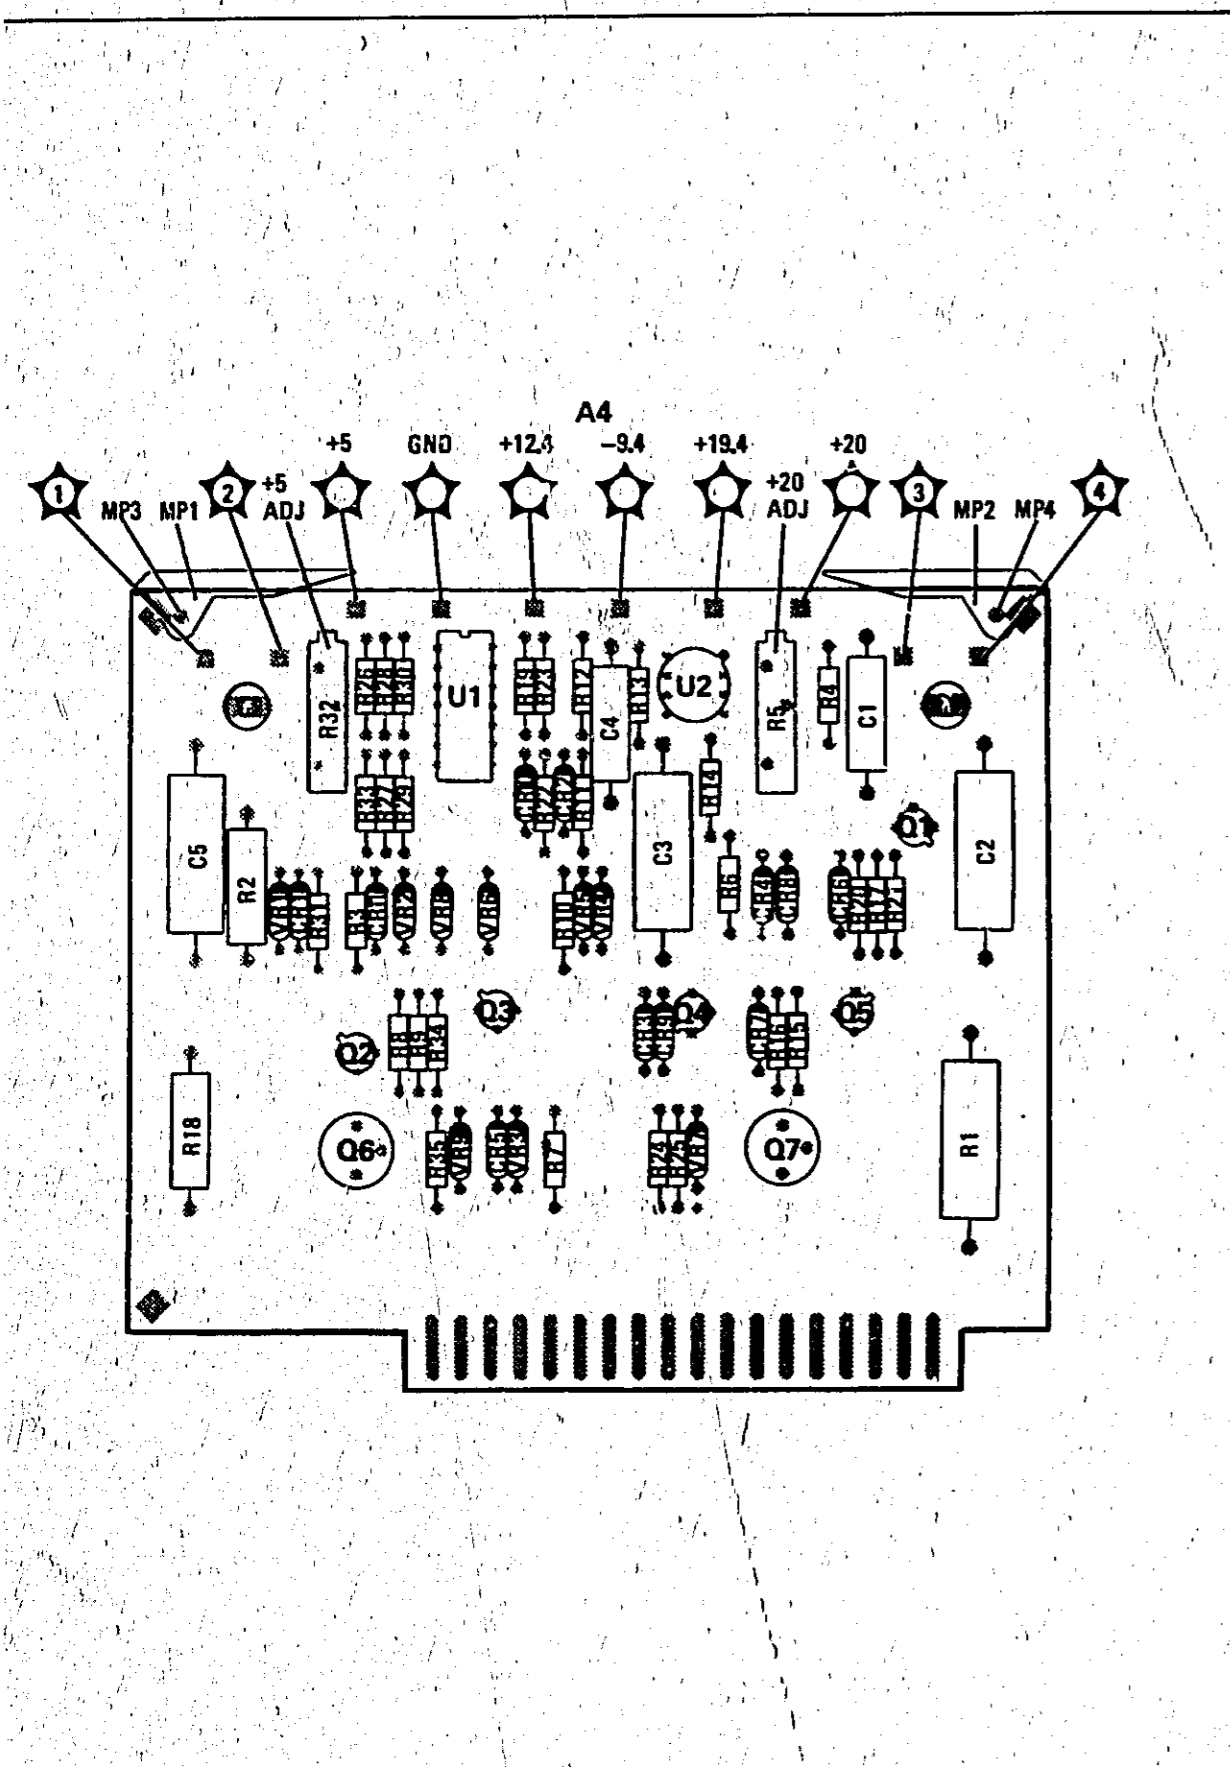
A4 +20V and +5V Regulator Assembly, Component Locations
